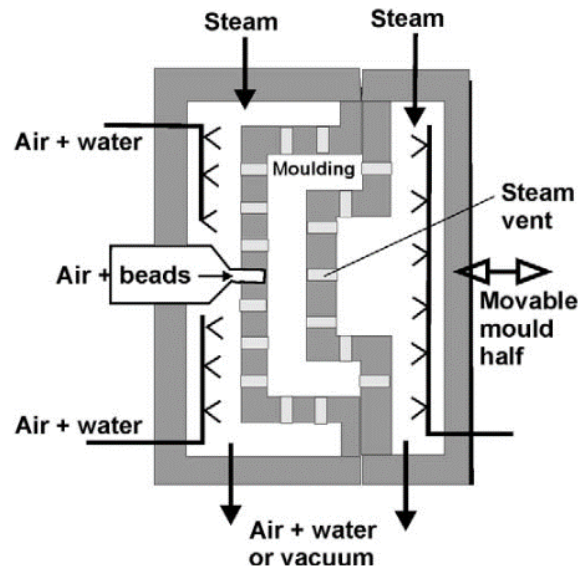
Mold structure used on EPS shape molding (Mills 2005)
